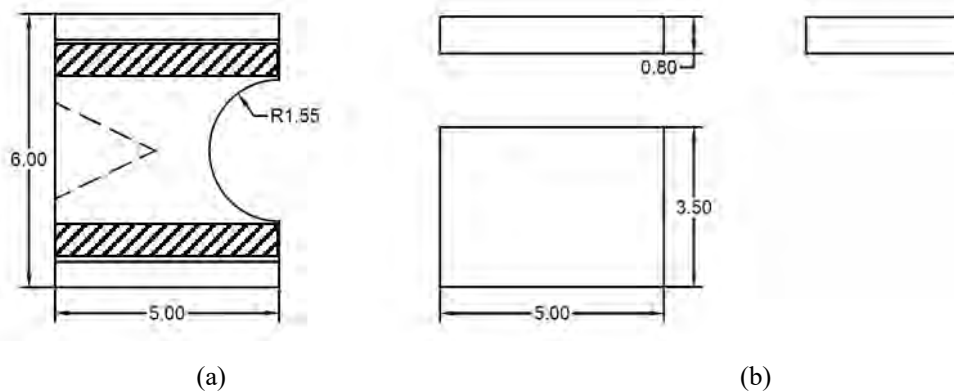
Schematic showing (a) tensile bar head dimensions and location of the cut (the marked area), and b) bend test sample dimensions (unit: mm).
